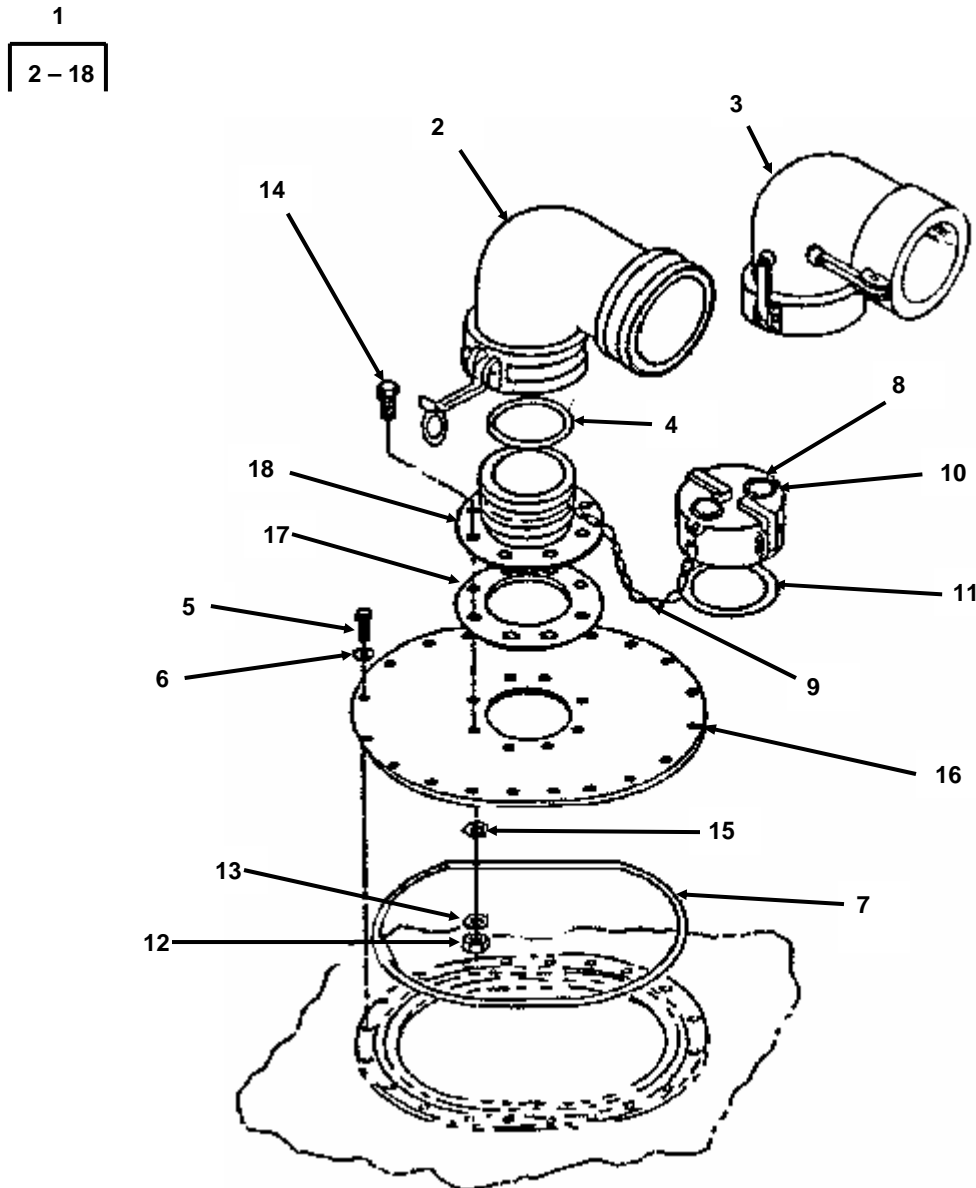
Filler/Discharge Assembly (GTA Container Models).
